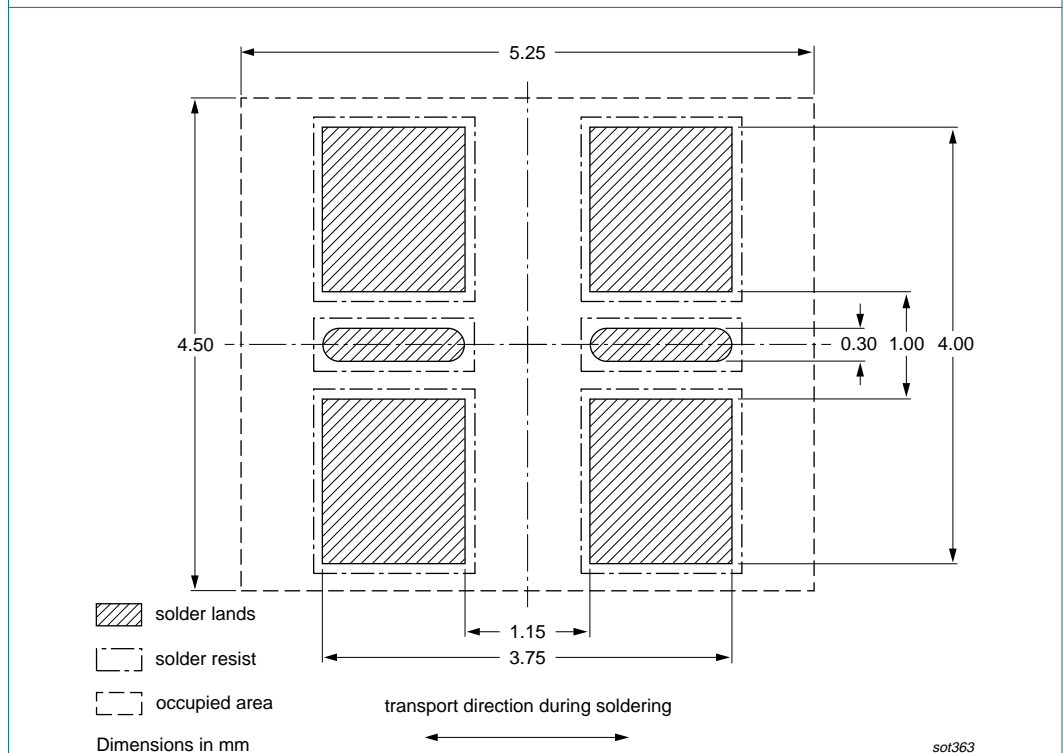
Wave soldering footprint BAV70S (SOT363/SC-88)
